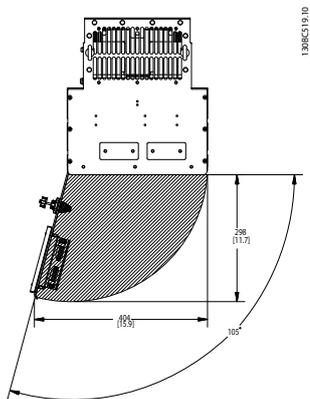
Front Clearance of IP21/IP54 Enclosure Type, Frame Size D1h, D5h, and D6h.
